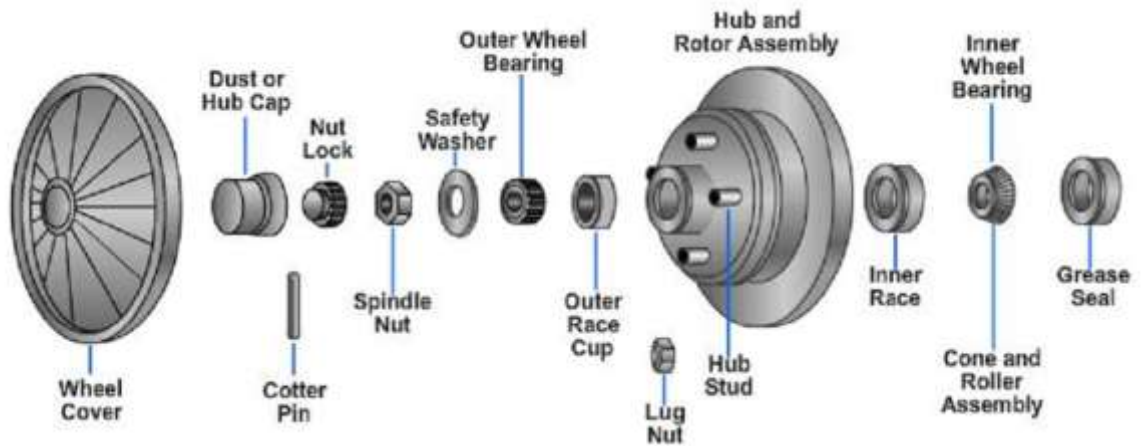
8 — View of a non-driving wheel bearing and hub assembly.
